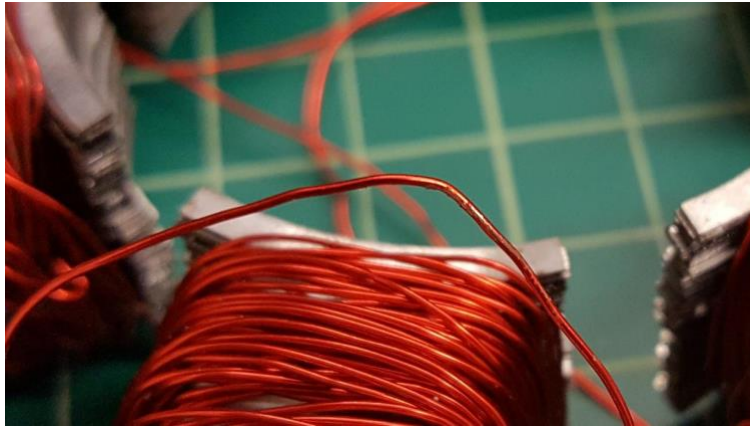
Close up photographs of wire insulation on stator removed from rough edges of the stator
